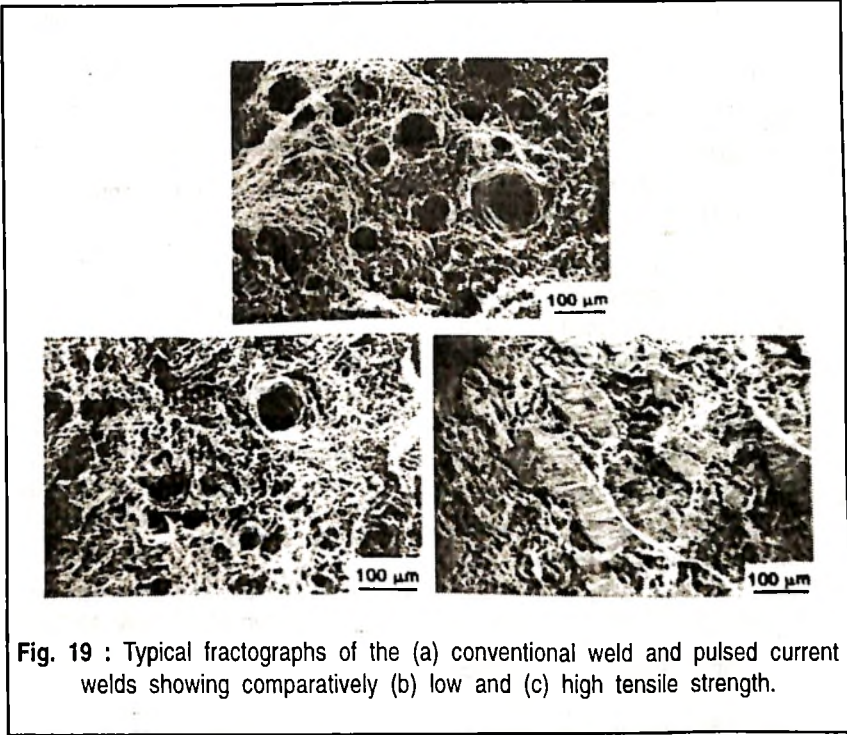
Typical fractographs of the (a) conventional weld and pulsed current welds showing comparatively (b) low and (c) high tensile strength.
